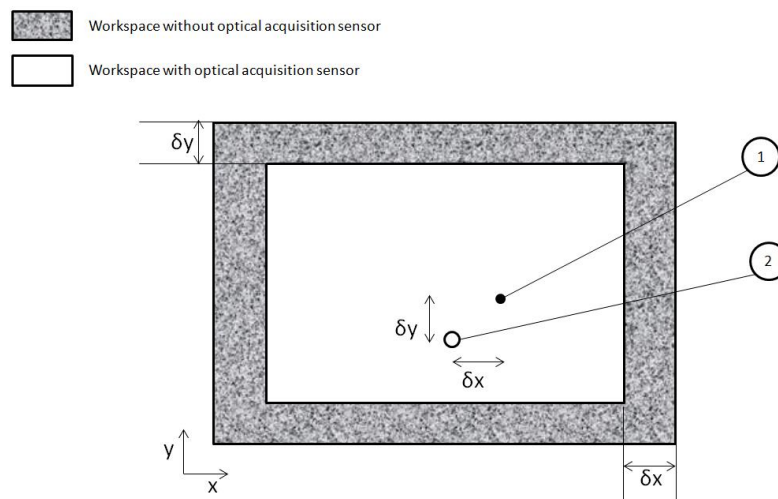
machine tool workspace loss due to sensor integration; 1: optical acquisition sensor, 2: machine tool end-effector
